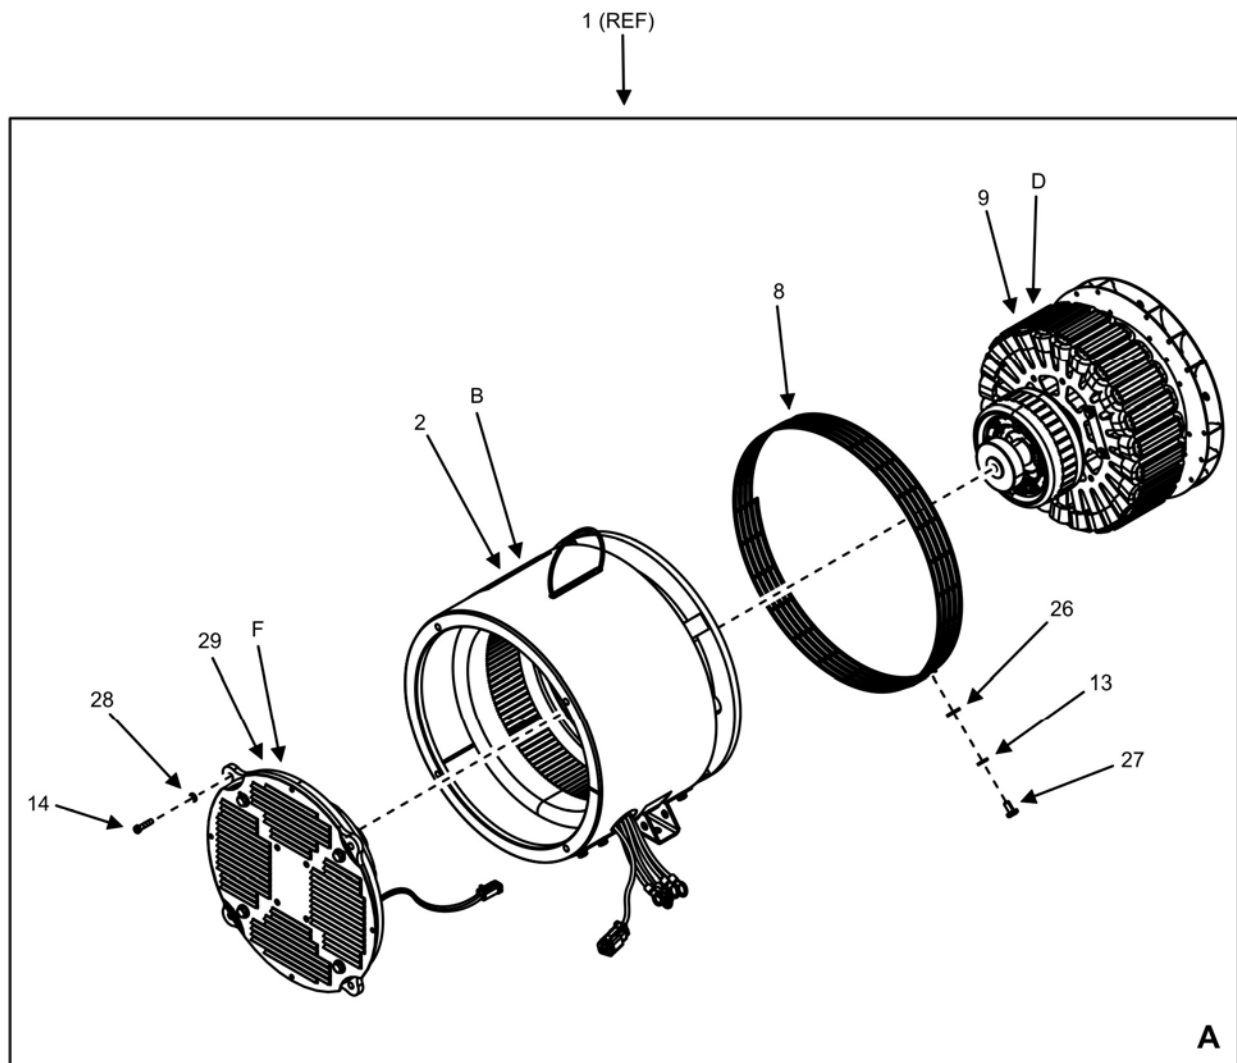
AC Generator Assembly, 400 Hz (Sheet 2 of 3).
